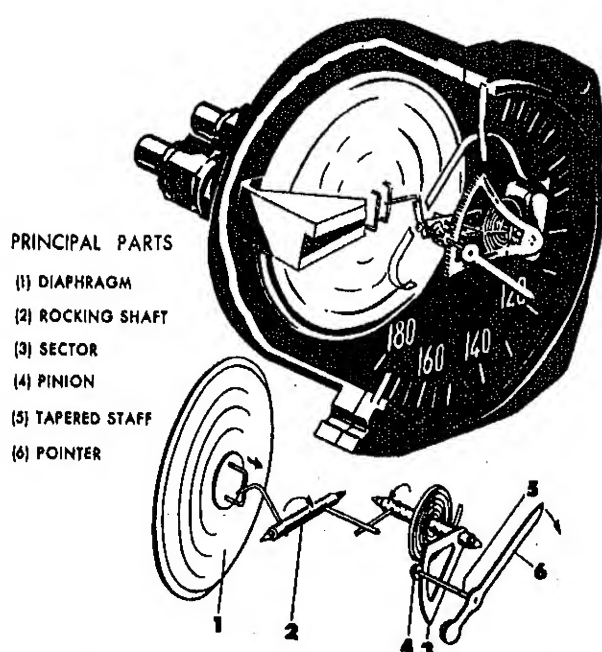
Cutaway view of the airspeed indicator with component parts.
